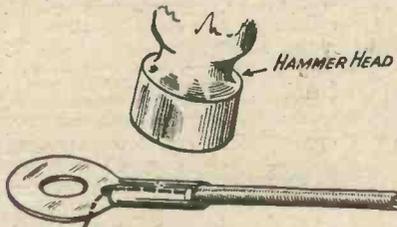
Another form of tag which can be satisfactorily attached to a flex lead without solder.
